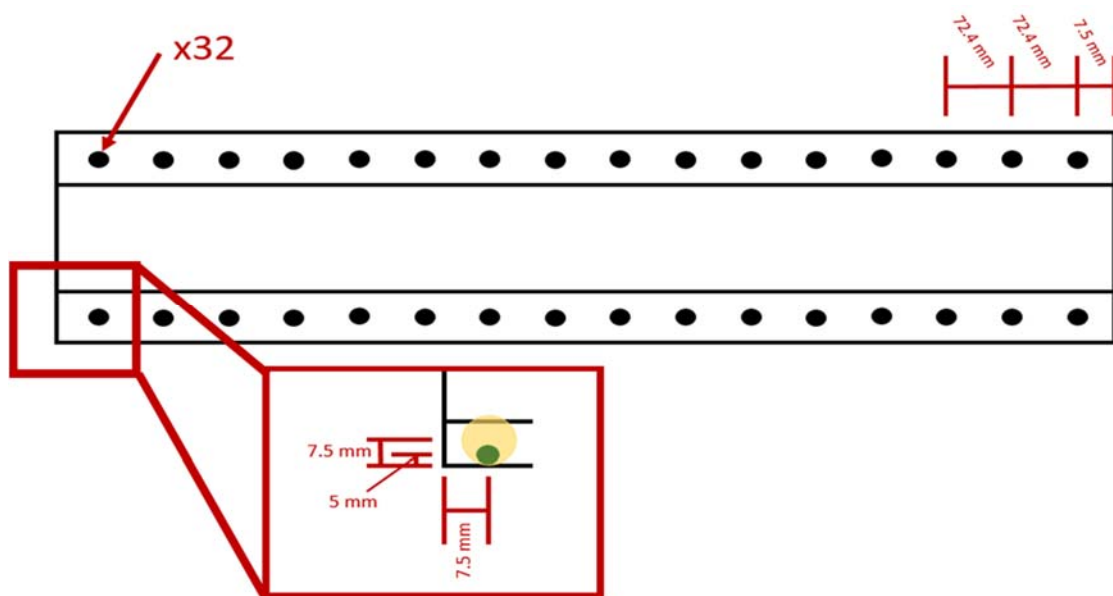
C.2: Top view schematic of double hat section showing positioning of modeled spot welds.
